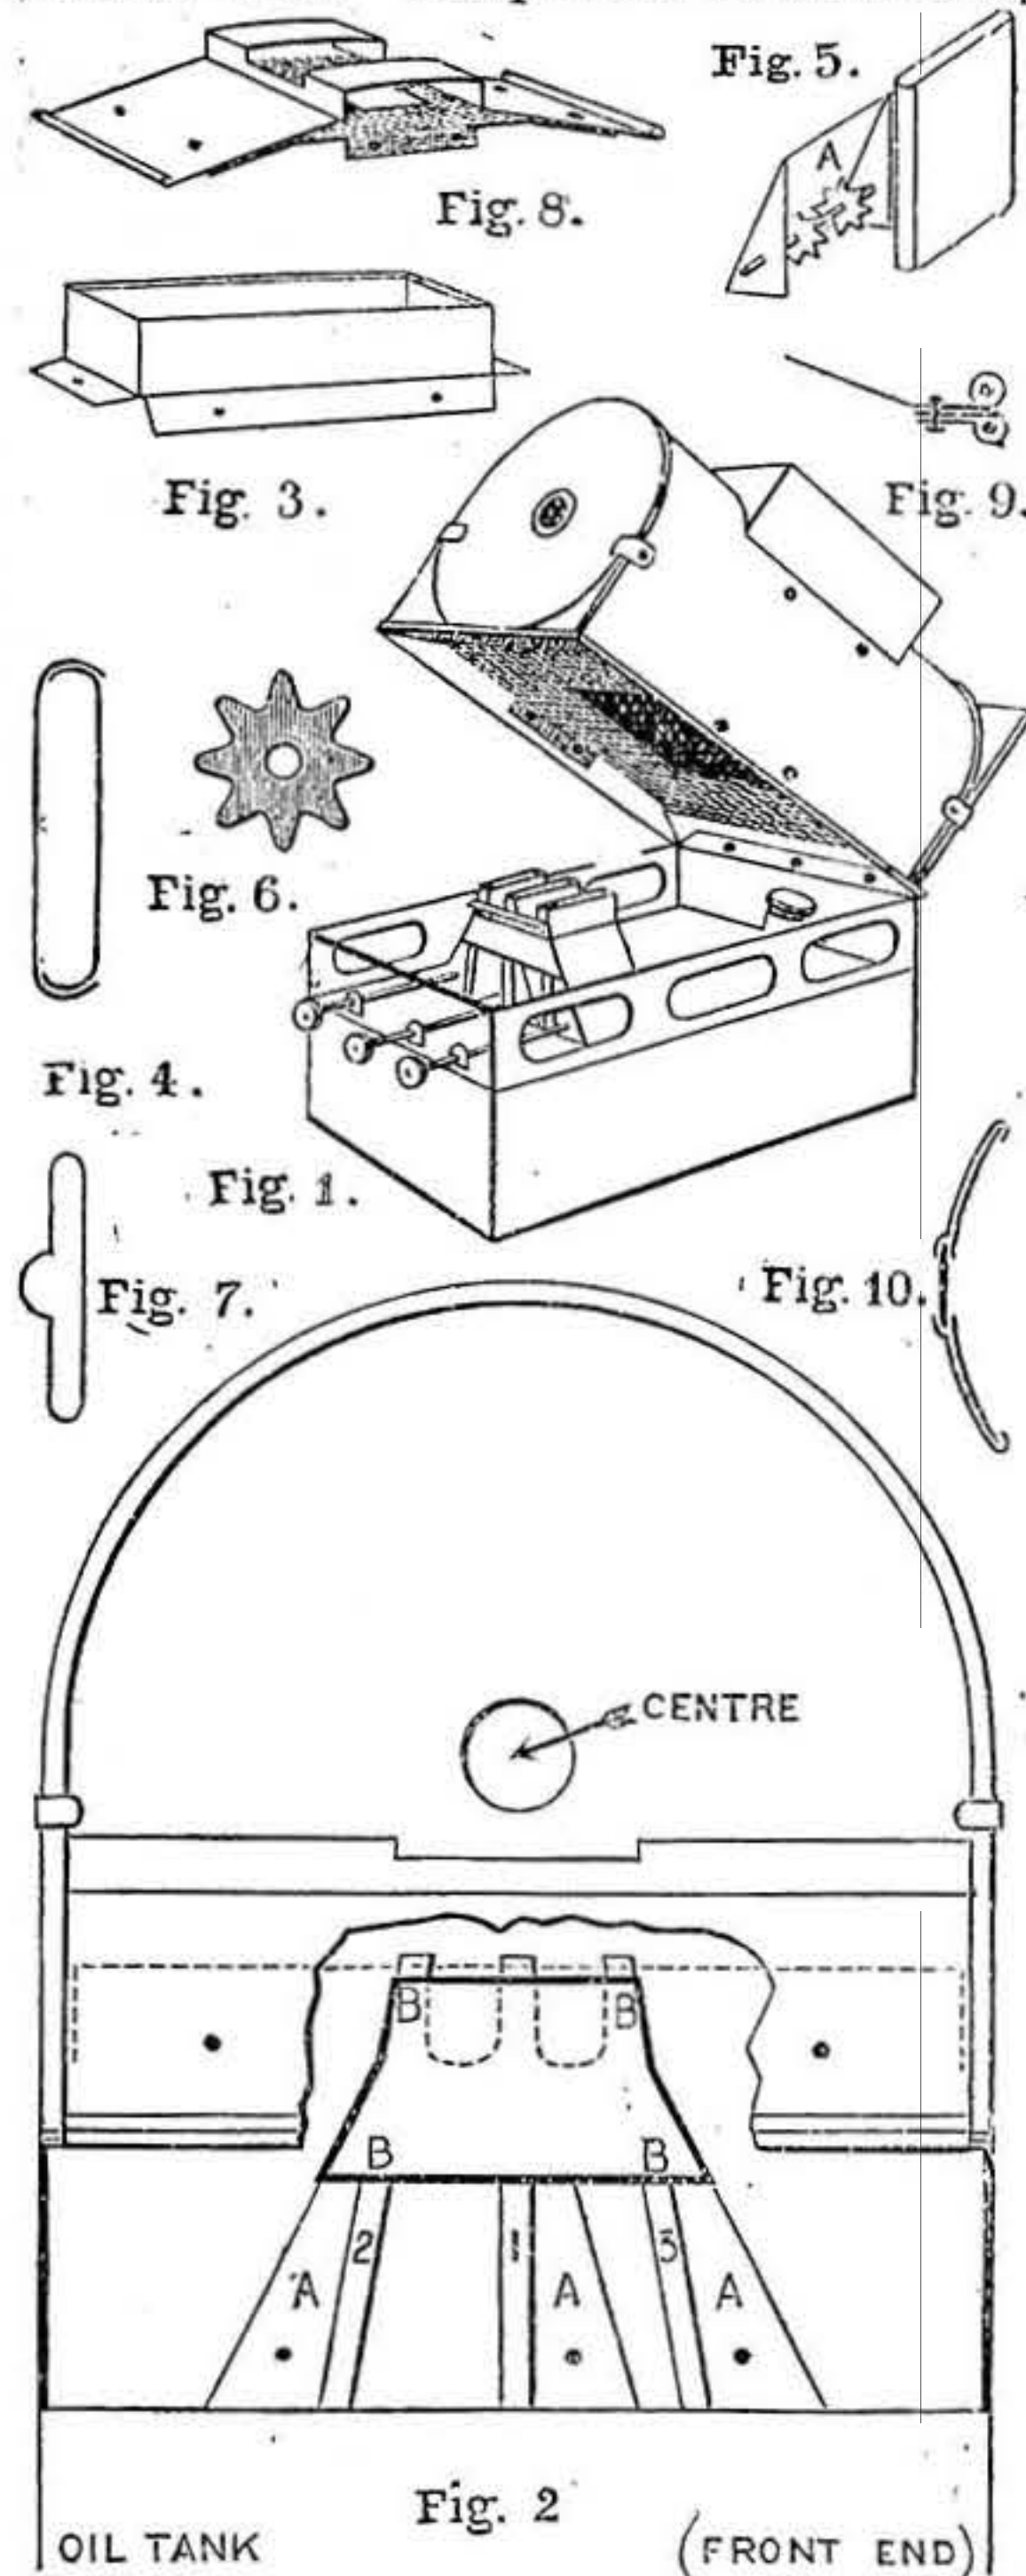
Lamp complete. Fig. 2.—Front View of Lamp (half size). Fig. 3.—Support for Chimney. Fig. 4.—Section of Wick Tube. Fig. 5.—Wick Tube complete, separated to show Arrangement of Parts. Fig. 6.—Wheel for Winder (full size). Fig. 7.—Shape of Hole in Top of Tank for Wick Tube. Fig. 8.—Wick Cover to fit in Dome. Fig. 9.—Section of Hinge. Fig. 10.—Section of Reflector in Frame.
